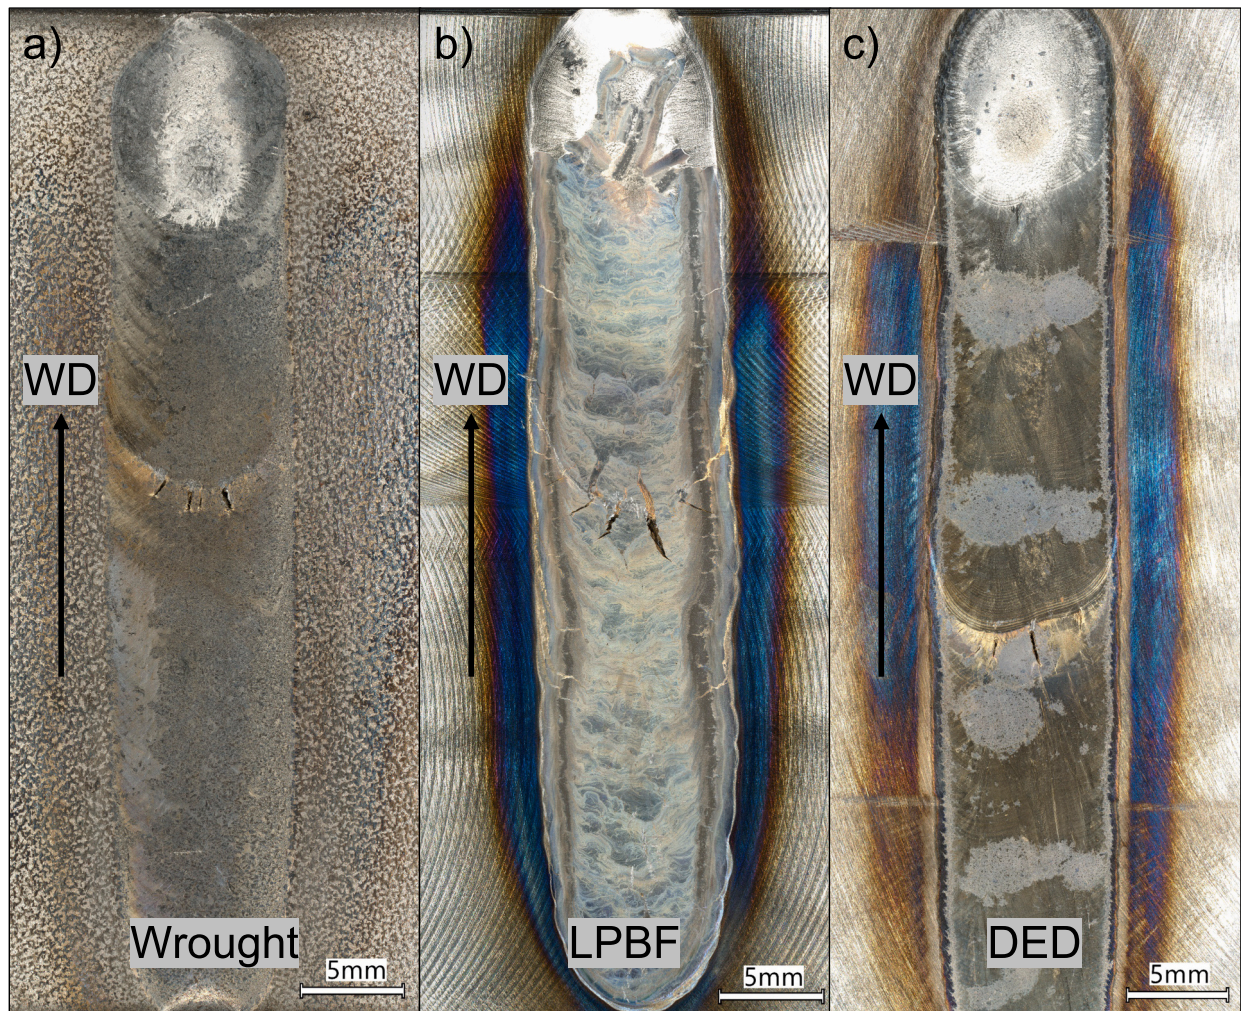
Alloy 625 weld beads produce at 3 % strain. a) Wrought, b) LPBF, and c) DED.
